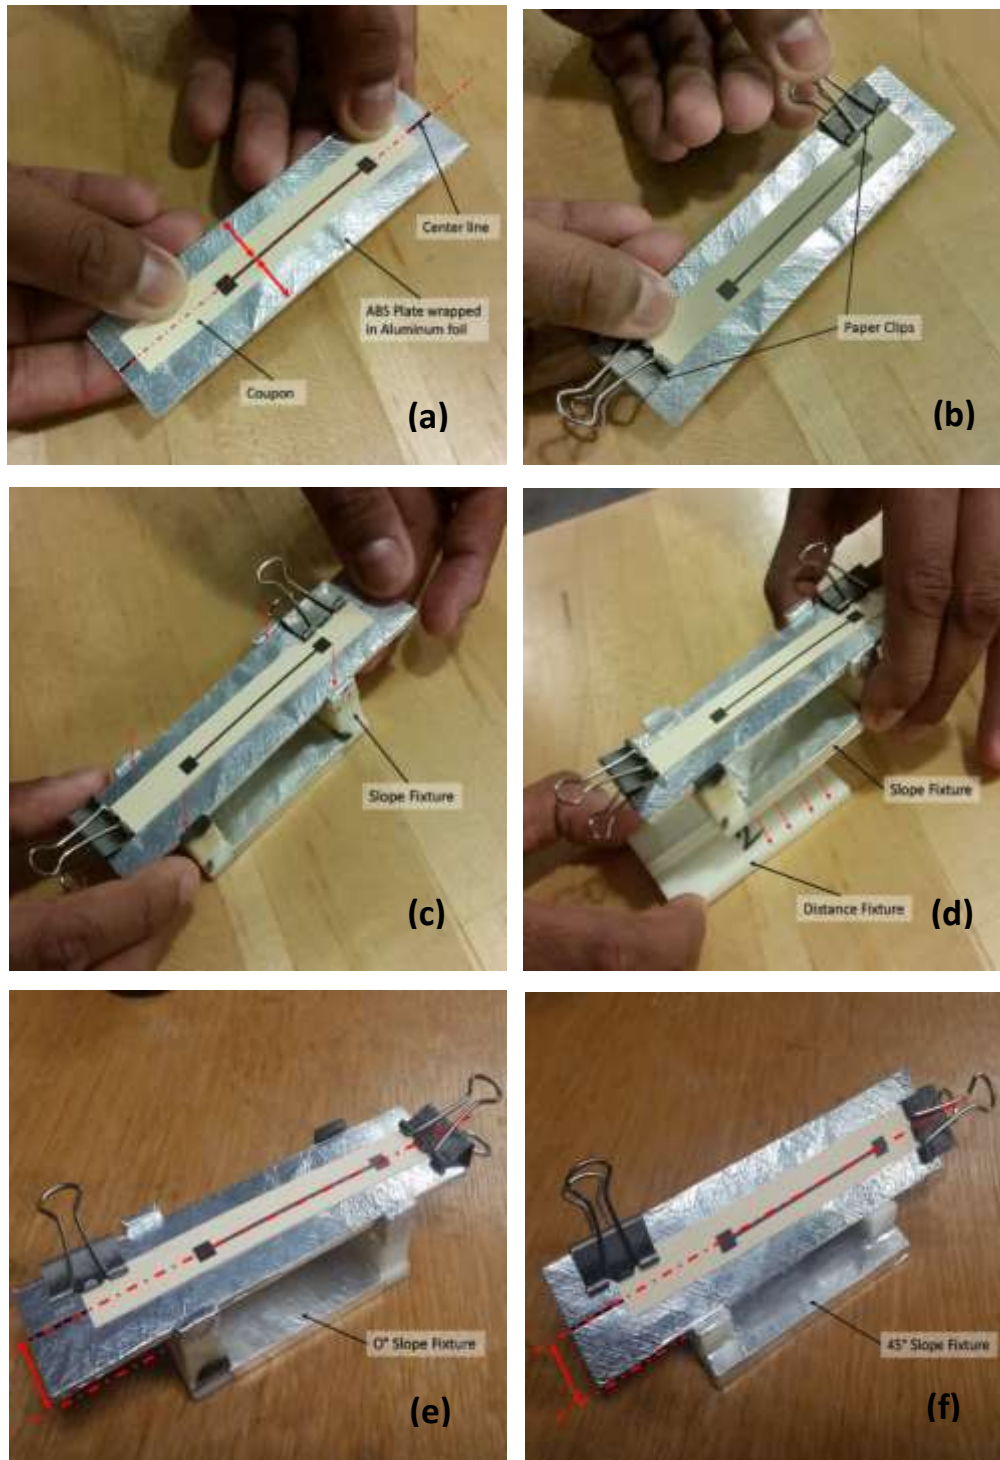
Steps Illustrating for Fixing the Printed Coupons onto the Fixtures
